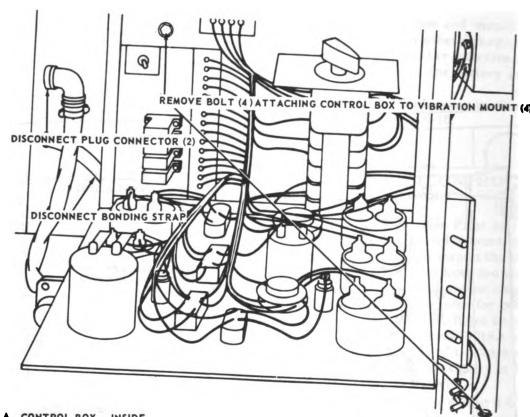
Control cabinet assembly, removal and installation (Model MEP-018A).
